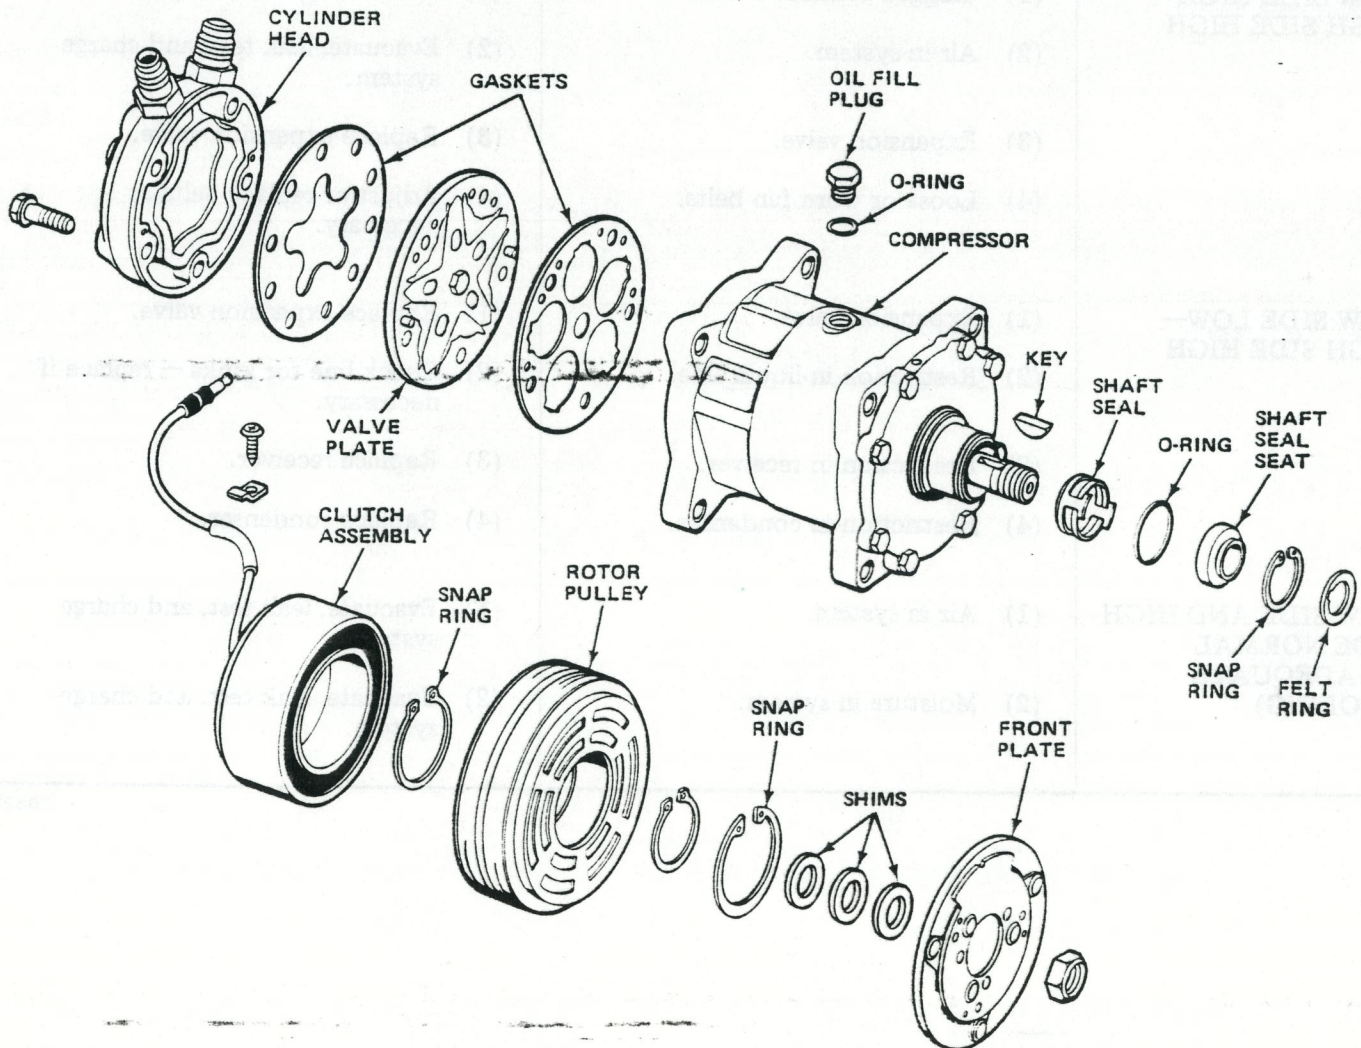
E-24 Compressor Components—California Six-Cylinder Engine
